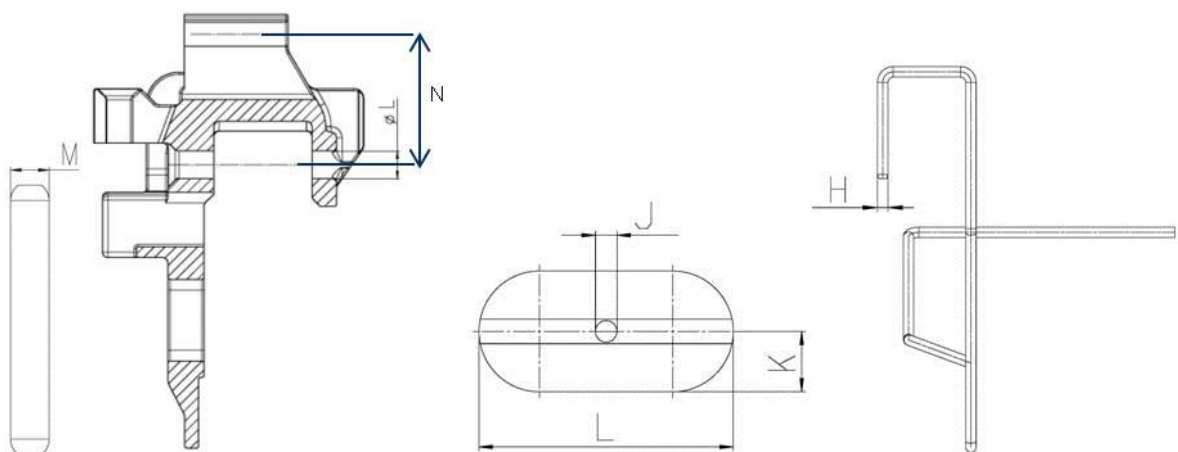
Dimensions of FLS components relevant for the tolerance analysis.
